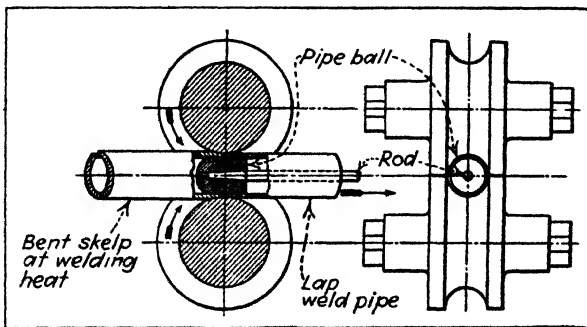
Lap-welding steel pipe over a mandrel. (From "The A.B.C. of Iron and Steel.")
